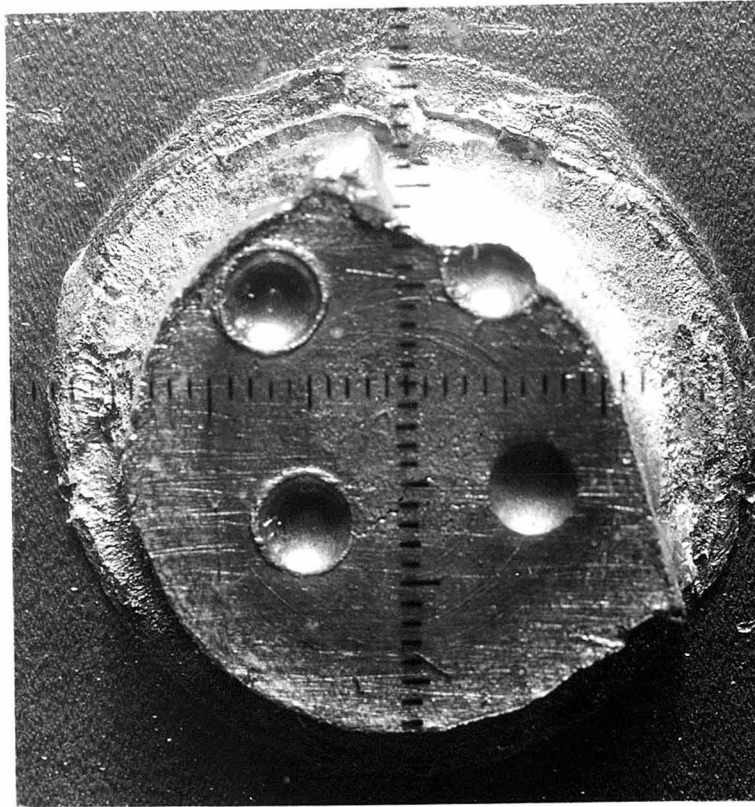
SPOTWELD FAILURE BY "PULLING A BUTTON".
